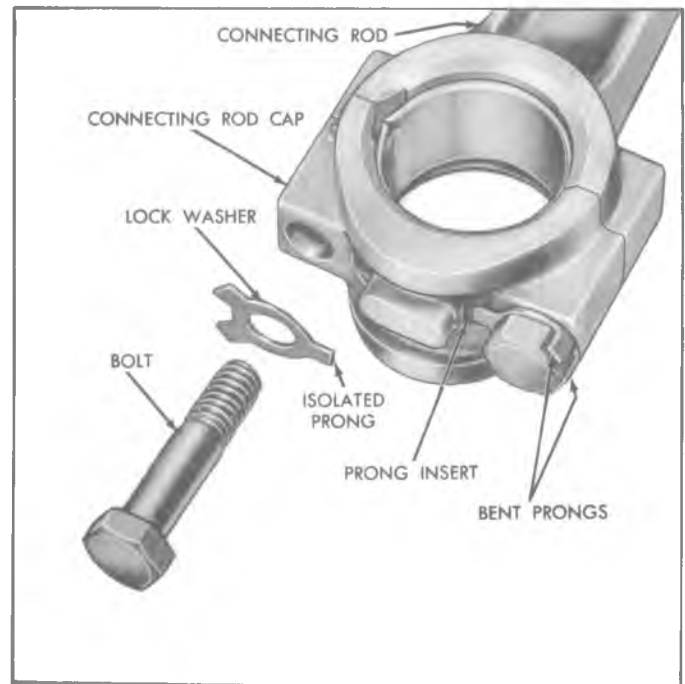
Installation of Lockwasher and Bolt on Connecting Rod and Cap
